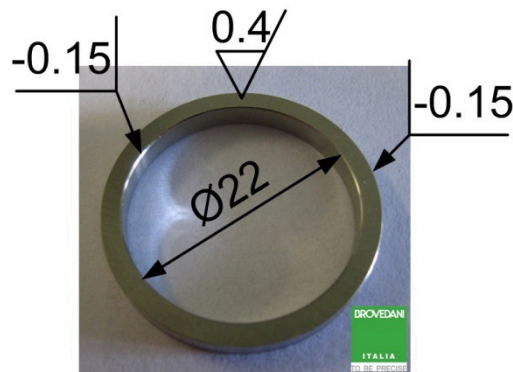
Automotive component for testing prototype machine (Courtesy of Brovedani SpA)
